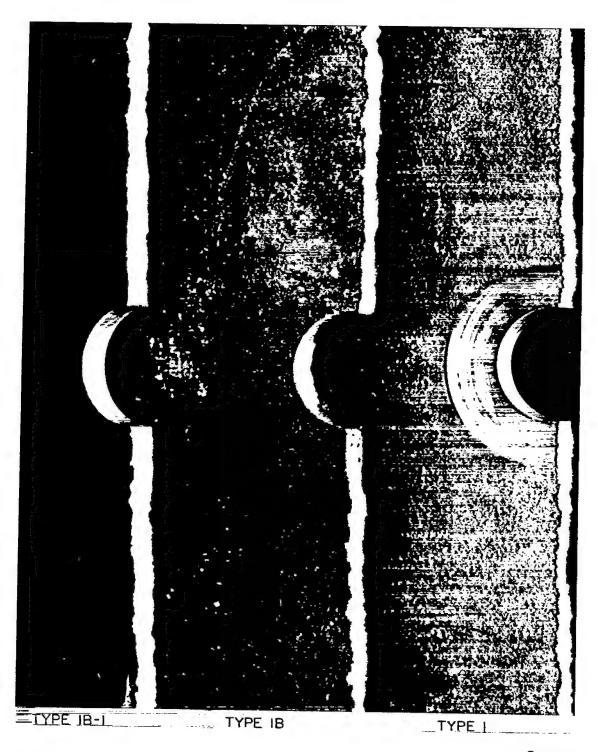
Conditions of open hole in monobloc sand-cast specimen.
